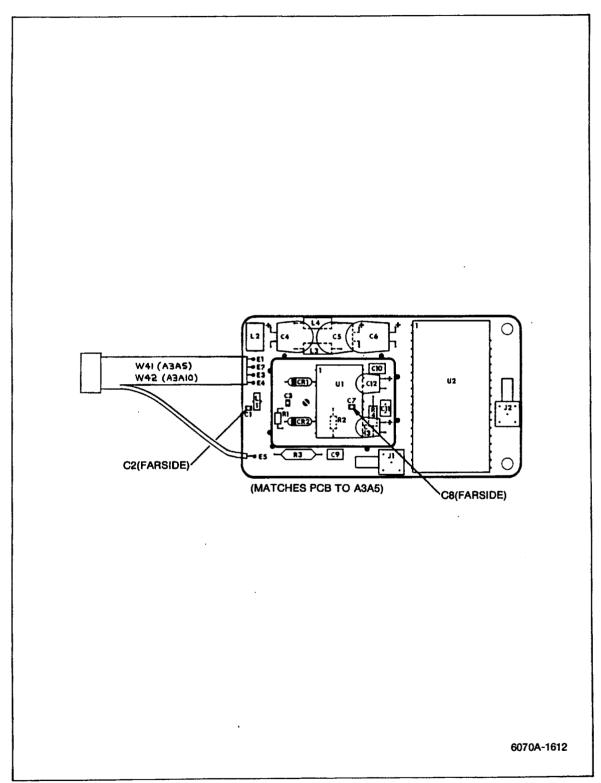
A3A10 VCO Resonator PCB Assembly
